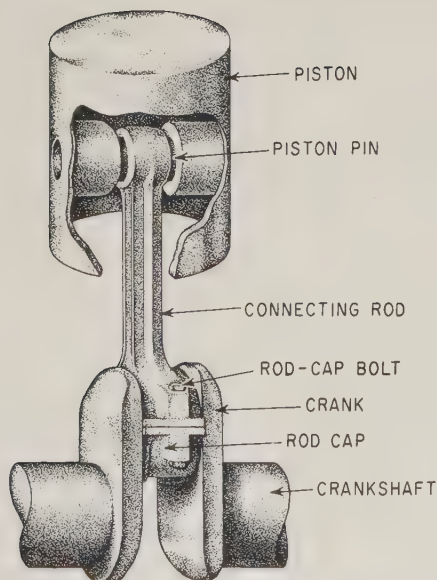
Piston and connecting-rod assembly attached to the crankpin on a crankshaft. The piston rings are not shown. The piston is pictured as if cut away to show how it is attached to the connecting rod.
